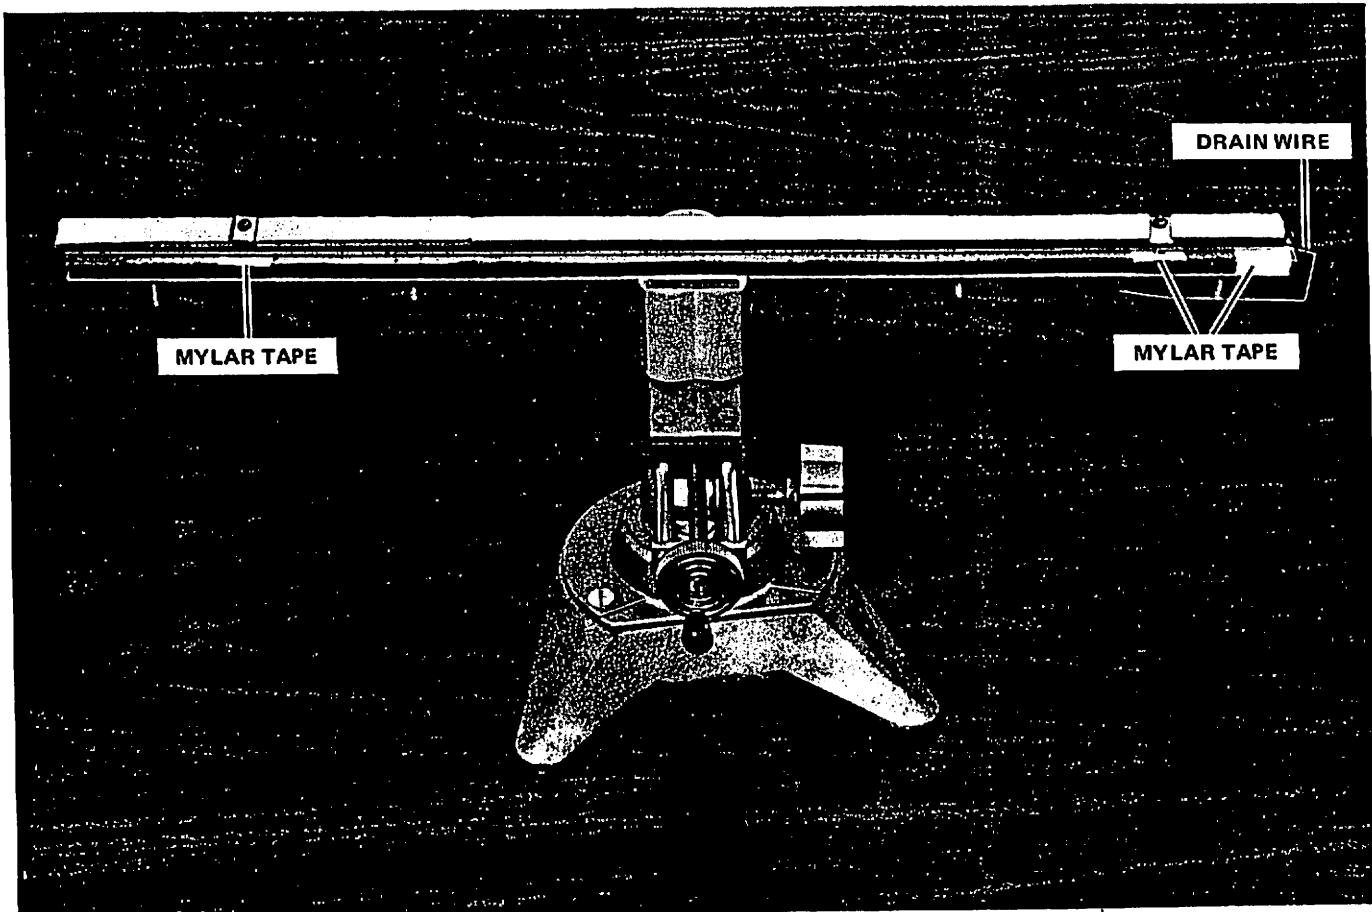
TOUCH SENSOR BAR REASSEMBLED
